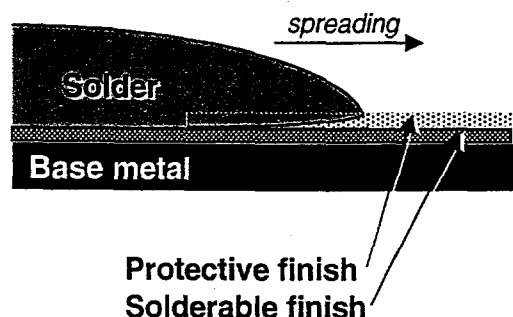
Schematic illustration of the role of the "protective finish" and "solderable finish" on the solder wetting/spreading process.
